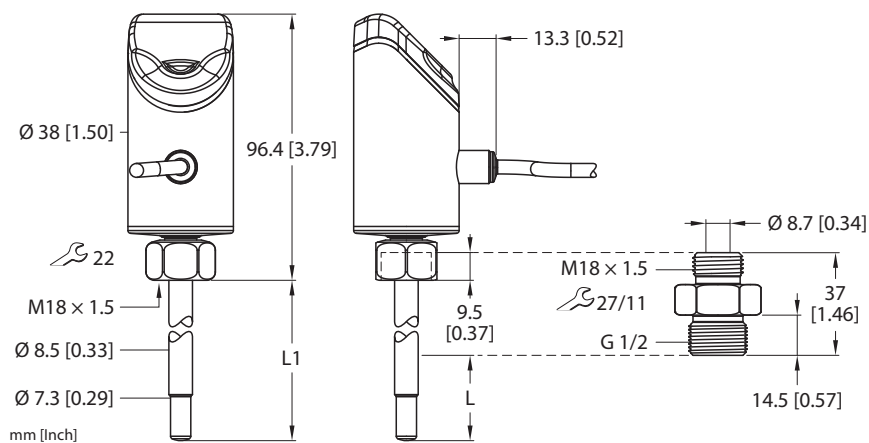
Dimensions — sensor with cable connection and G 1/2" screw-in adapter
